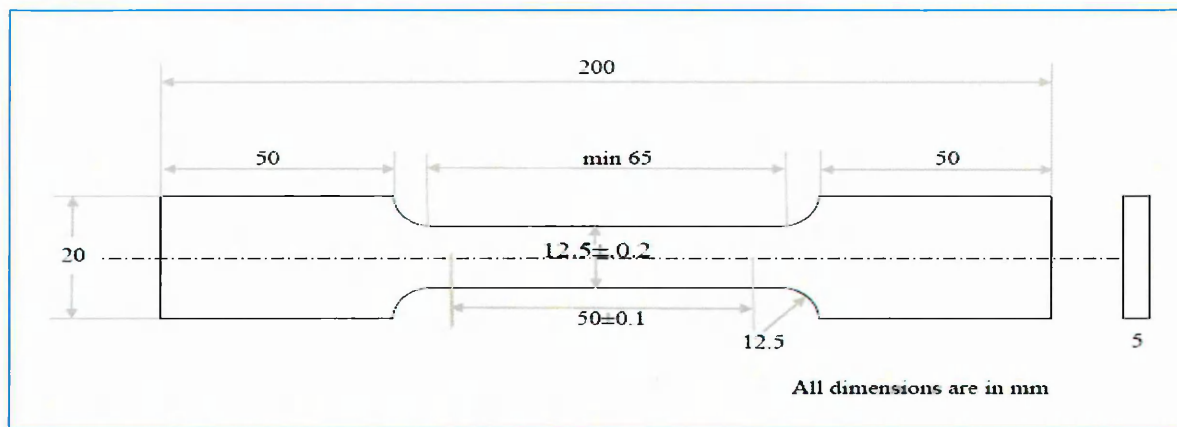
ASTM Standard E8-04, Standard test specimen for tension testing of metallic materials. Specimens were machined perpendicular to the rolling direction (Fig: Not to Scale).
